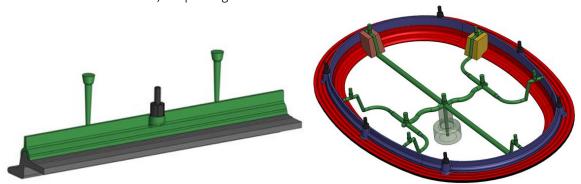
Hybrid material Window frame with metallic retainer elements, injection-moulded functional and stiffening elements and a continuous-fiber-reinforced structural inlay
